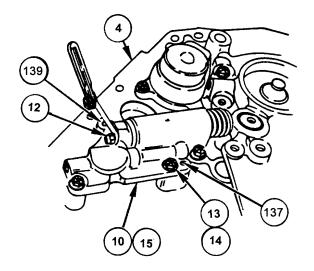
Brake Apply Regulator Valve. INSTALL LEFT BRAKE APPLY SHAFT AND RIGHT BRAKE APPLY CAM SHAFT
